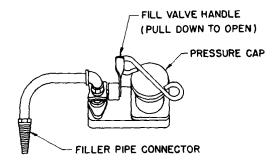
Cooling System Pressure Cap And Filler/Relief Arrangement
